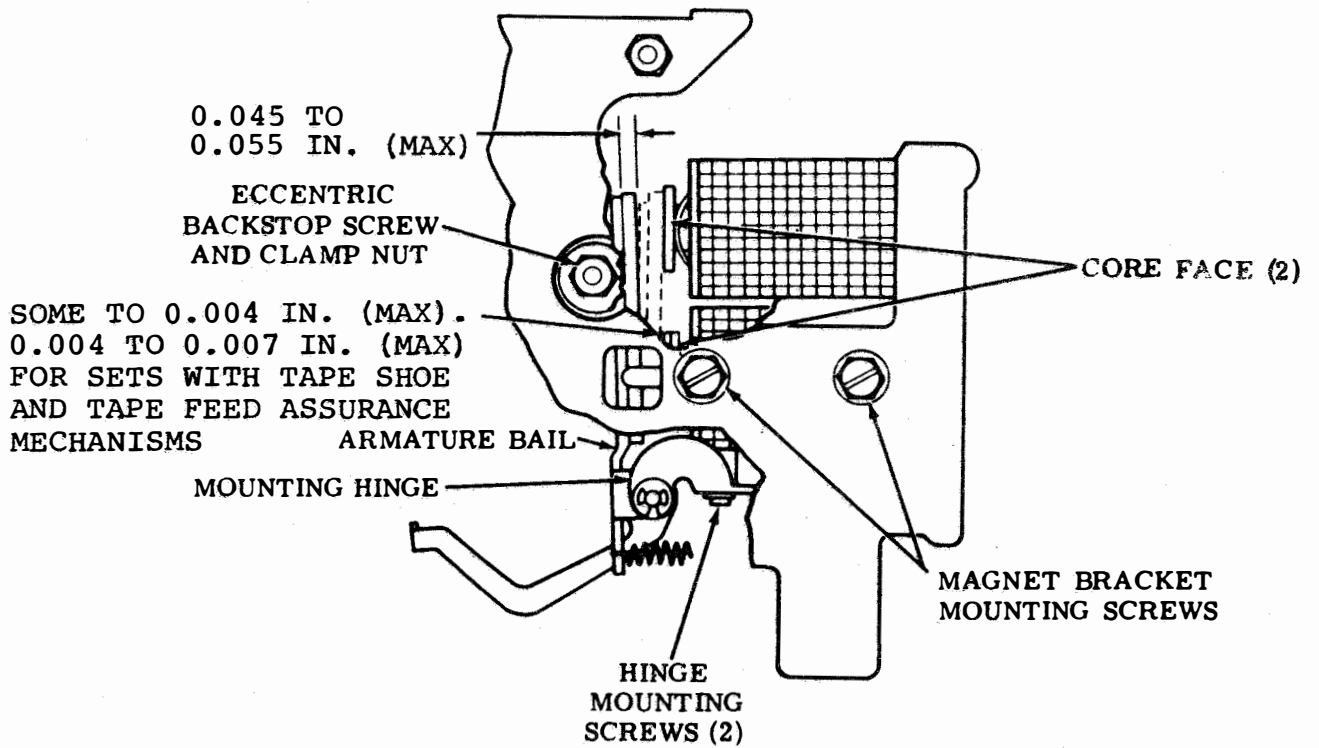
Clutch Magnet Assembly (Preliminary - Core Clearance and Armature Bail Clearance), Rear View
